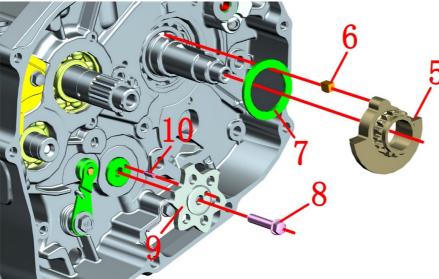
RIC	GHT CRANKCASE	Right box assembly-1	CHK	(0)
